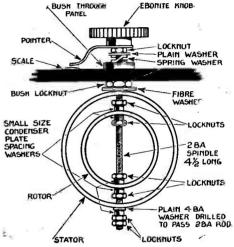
Method of Assembling Rotor and Stator on Spindle.
